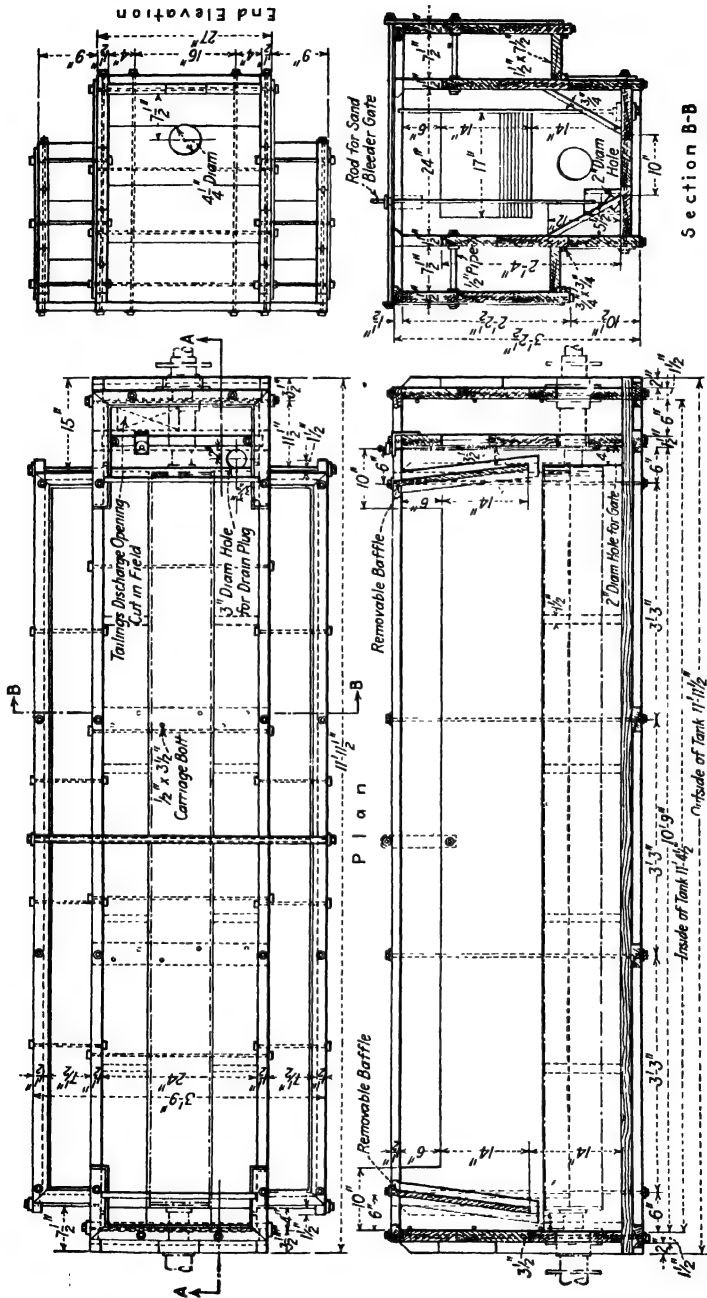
MacIntosh pneumatic machine. (The General Engineering Co.)
